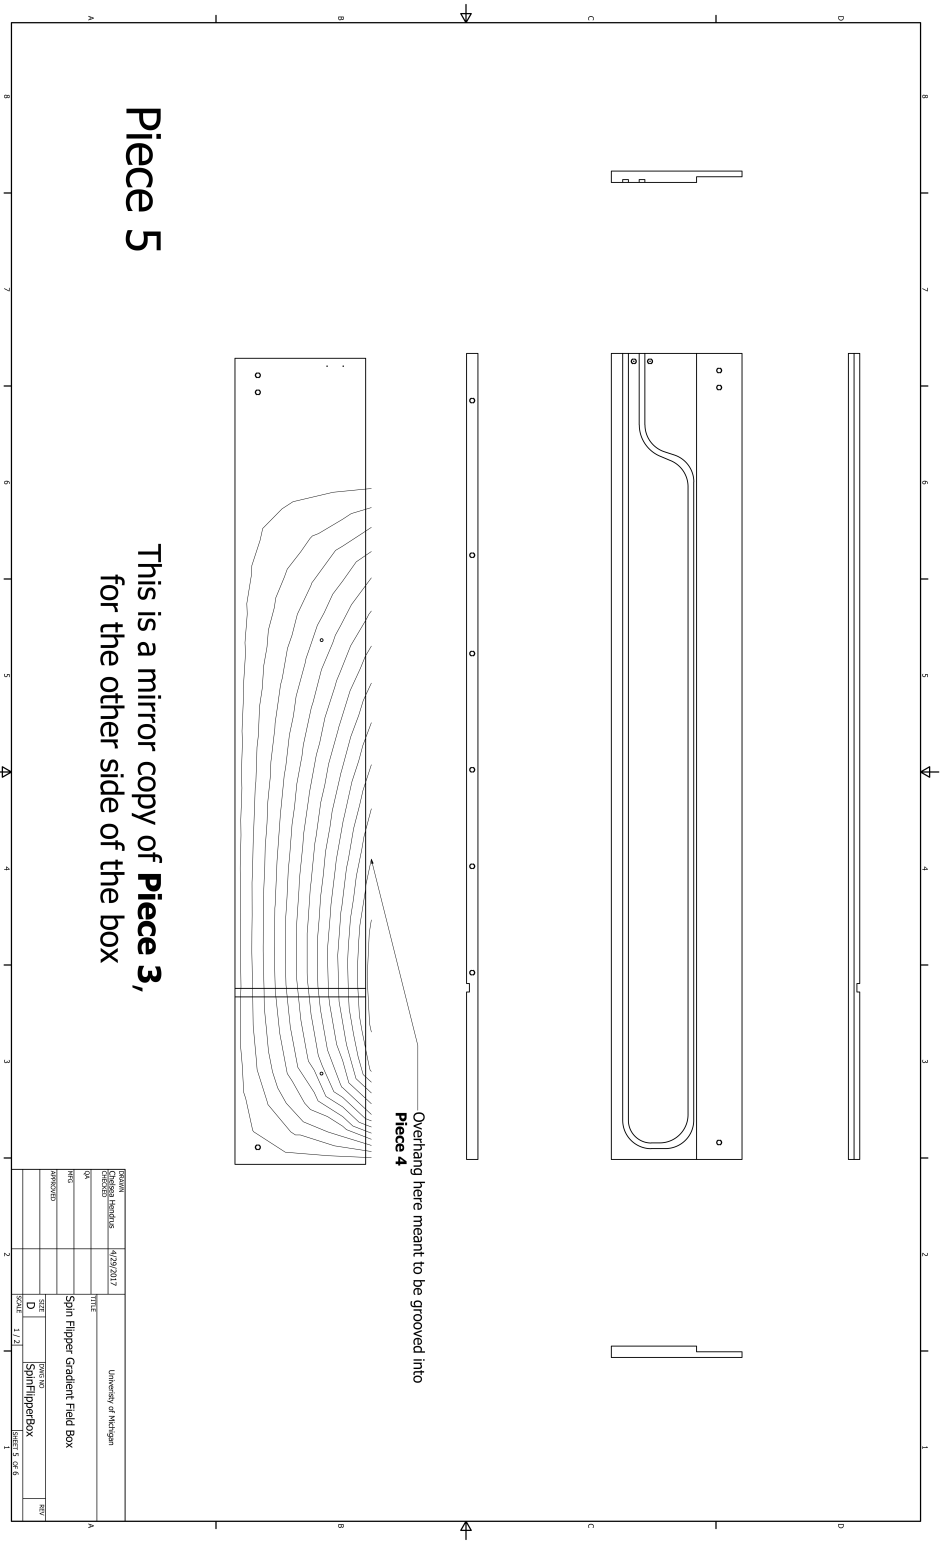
Page 5 of the Spin Flipper Detailed Drawings
